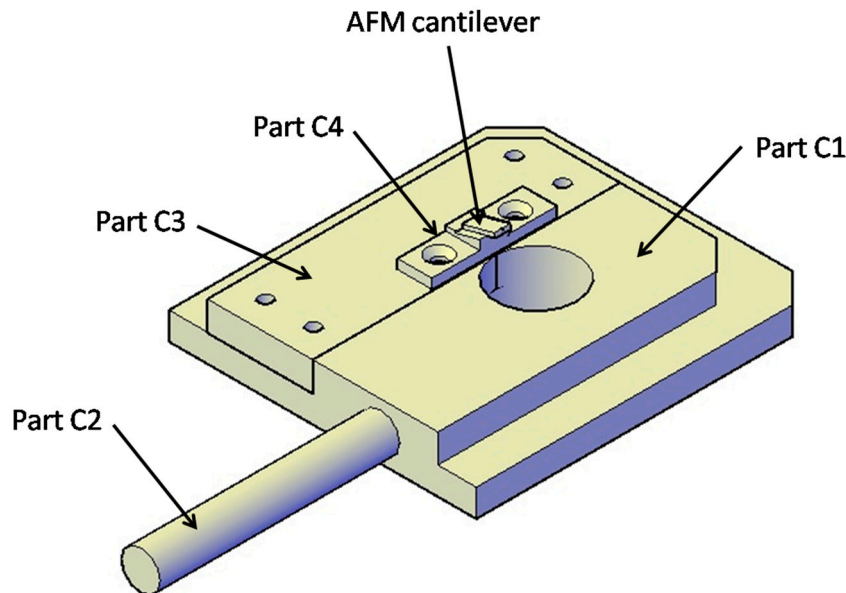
Parts listing for the cantilever holder used in the developed AFM. The cantilever holder consists of four custom parts (part C1, part C2, part C3, and part C4). The AFM cantilever is attached to part C4 with a small piece of double sided adhesive tape.
